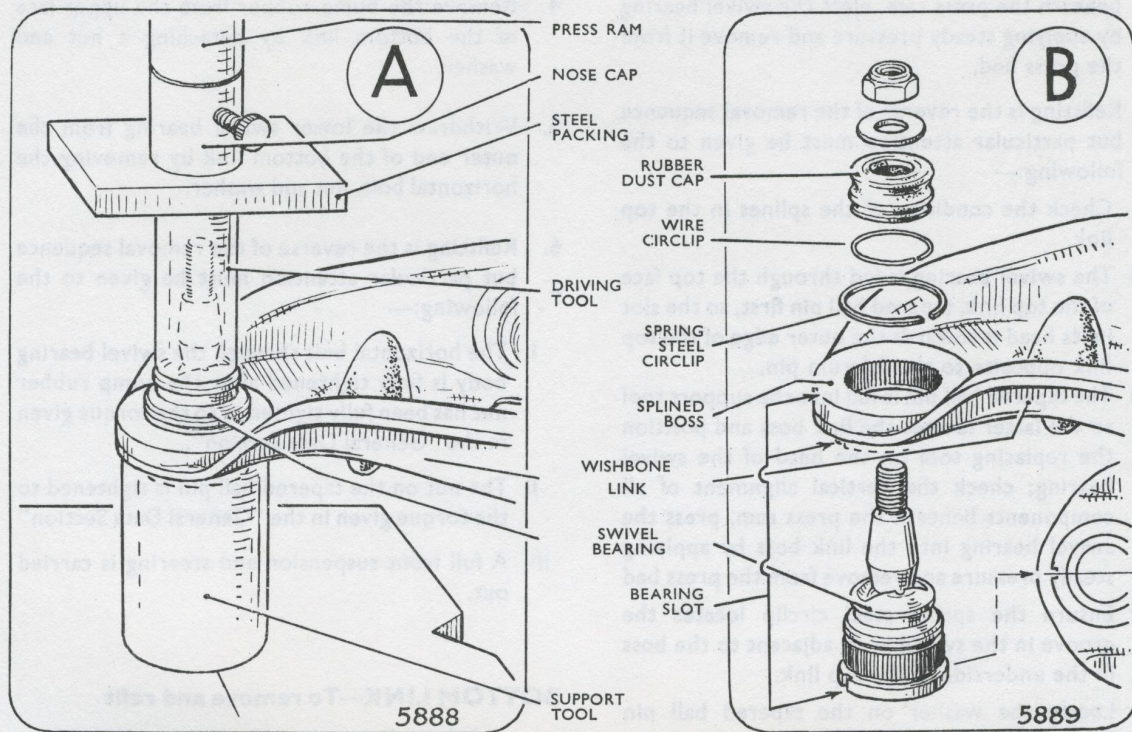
"A" pressing out swivel bearing from top link and "B" showing correct position of alignment slot when refitting swivel bearing
